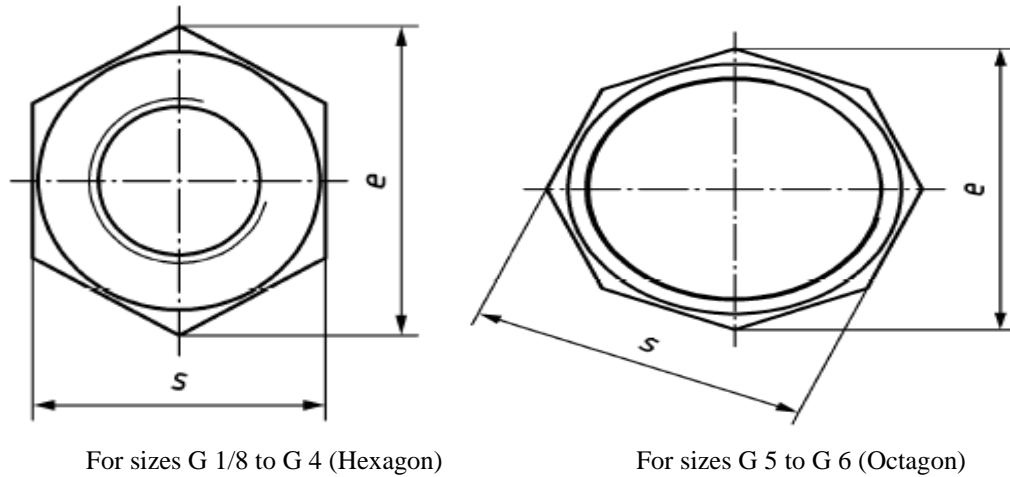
NUT DIMENSIONS (TYPE 1 AND TYPE 2)
